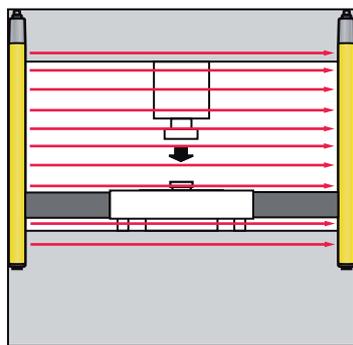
Fixed blanking: mechanical locks prevent side access to the protective field
